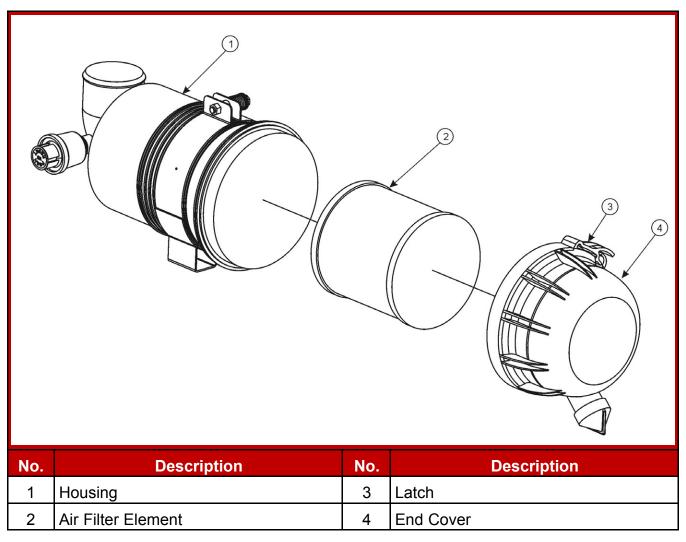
EXAMPLE OF HEAVY DUTY AIR CLEANER
